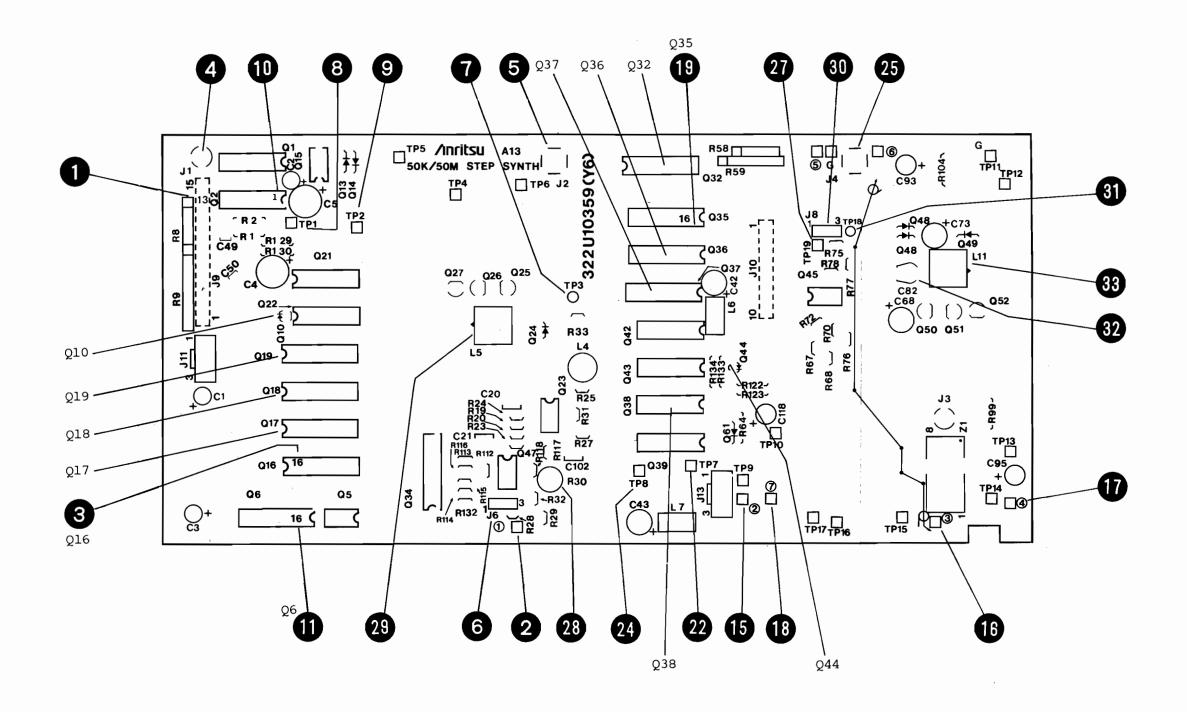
(a) Al-Al3 50 k/50 M STEP SYNTH PC Board Parts Layout (Parts Side)
